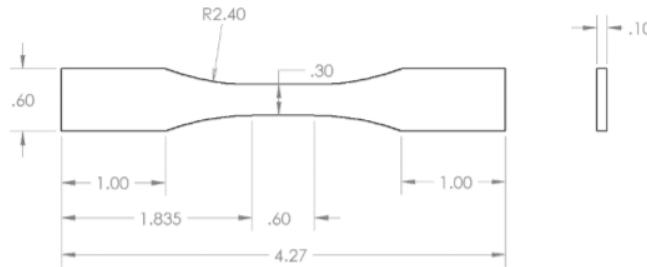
Nominal dimensions in inches of small fatigue specimens.
